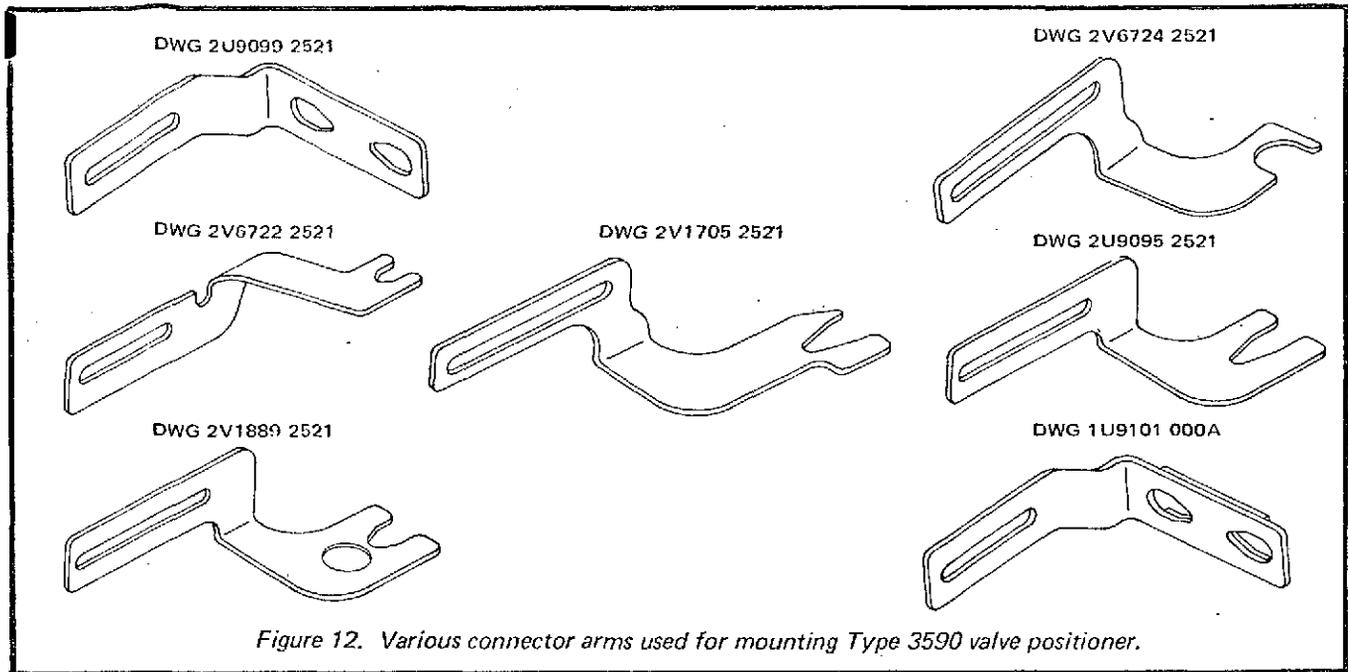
Various connector arms used for mounting Type 3590 valve positioner.
